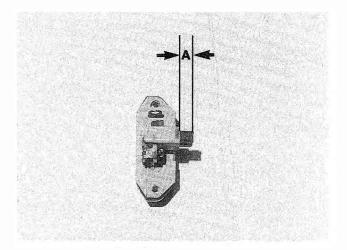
Alternator brush length being checked. Length A of new brushes is 12 mm (15/32 in.). Replace brushes worn to 5 mm (7/32 in.) or less.
